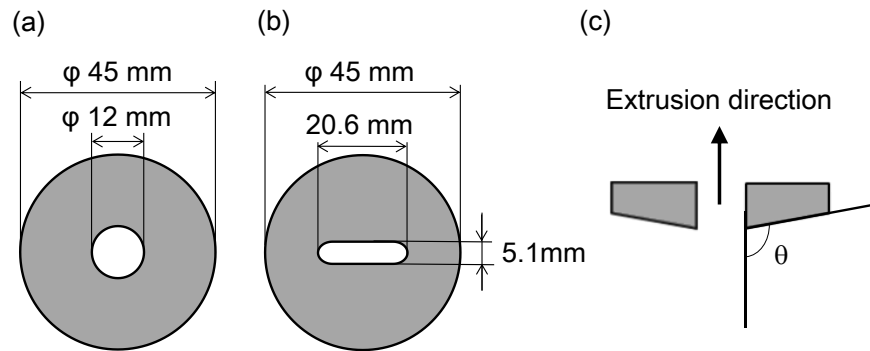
Schematic drawings of the dies; (a) overhead view of a die, (b) overhead view of a die used for specimen fabrication of bending and tensile tests and (c) cross section of the die.
